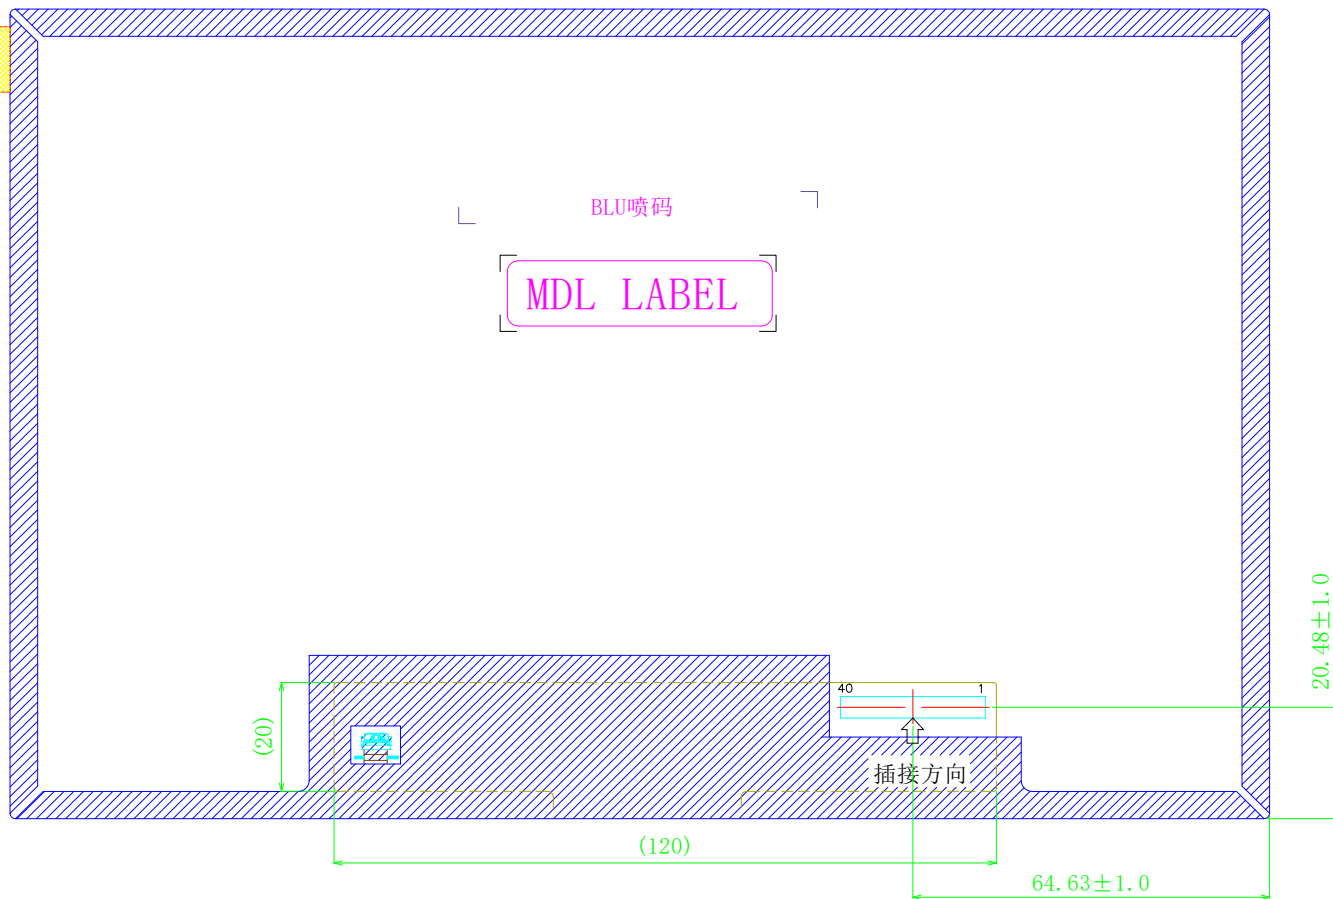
TFT-LCD Module Outline Dimensions (Rear view)
